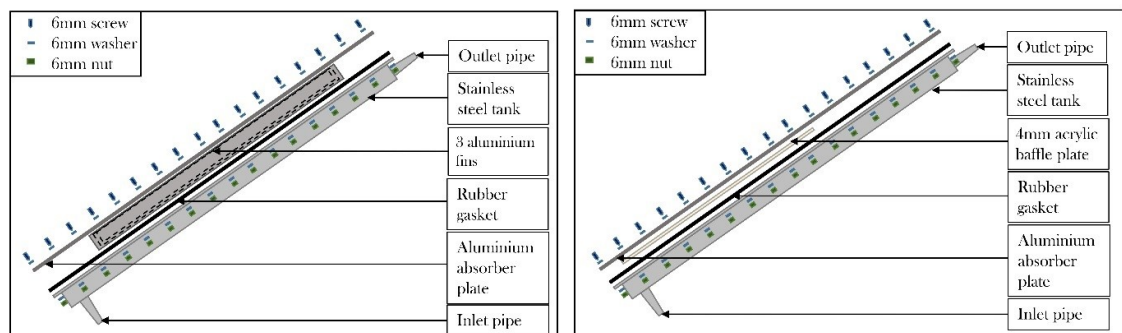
Side exploded elevation of the proposed prototypes with details of collector components. Left: "finned" design; right: "baffled" design
